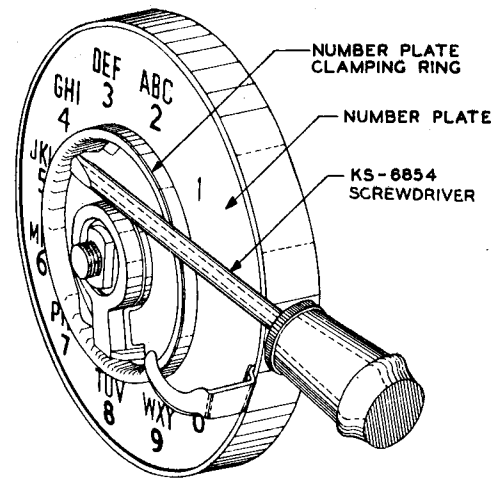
Method of Removing the Number Plate Clamping Ring on Dials Equipped With 132-type Number Plates
